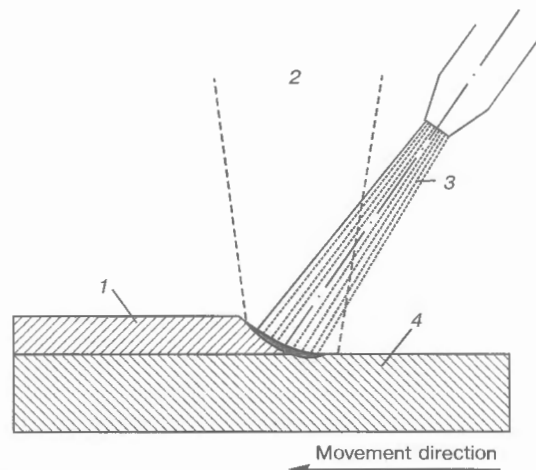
Block-diagram of powder spraying by a laser beam: 1 — coating; 2 — laser beam impact zone; 3 — gas-powder mixture; 4 — base metal
